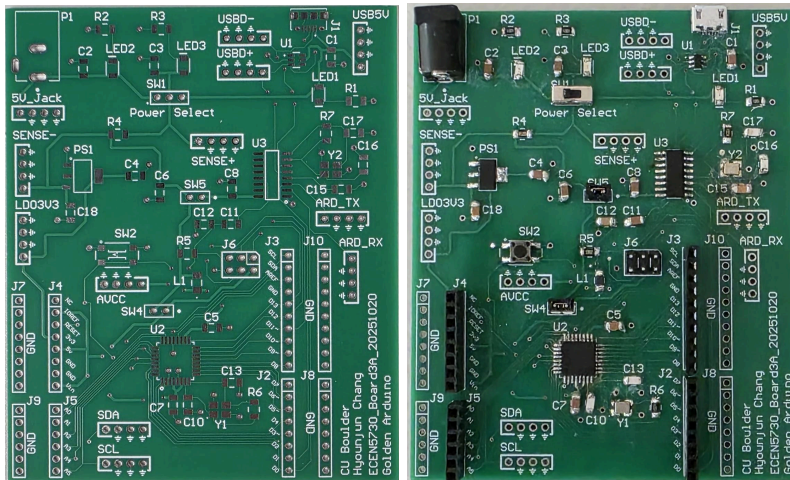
Physical PCB for Board 3 (Left: Unassembled, Right: Assembled)
